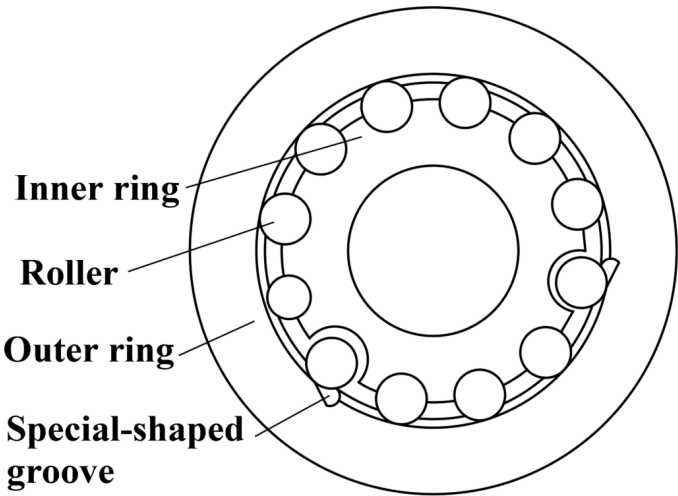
Retainer-free one-way rolling bearing CN219692021U.
